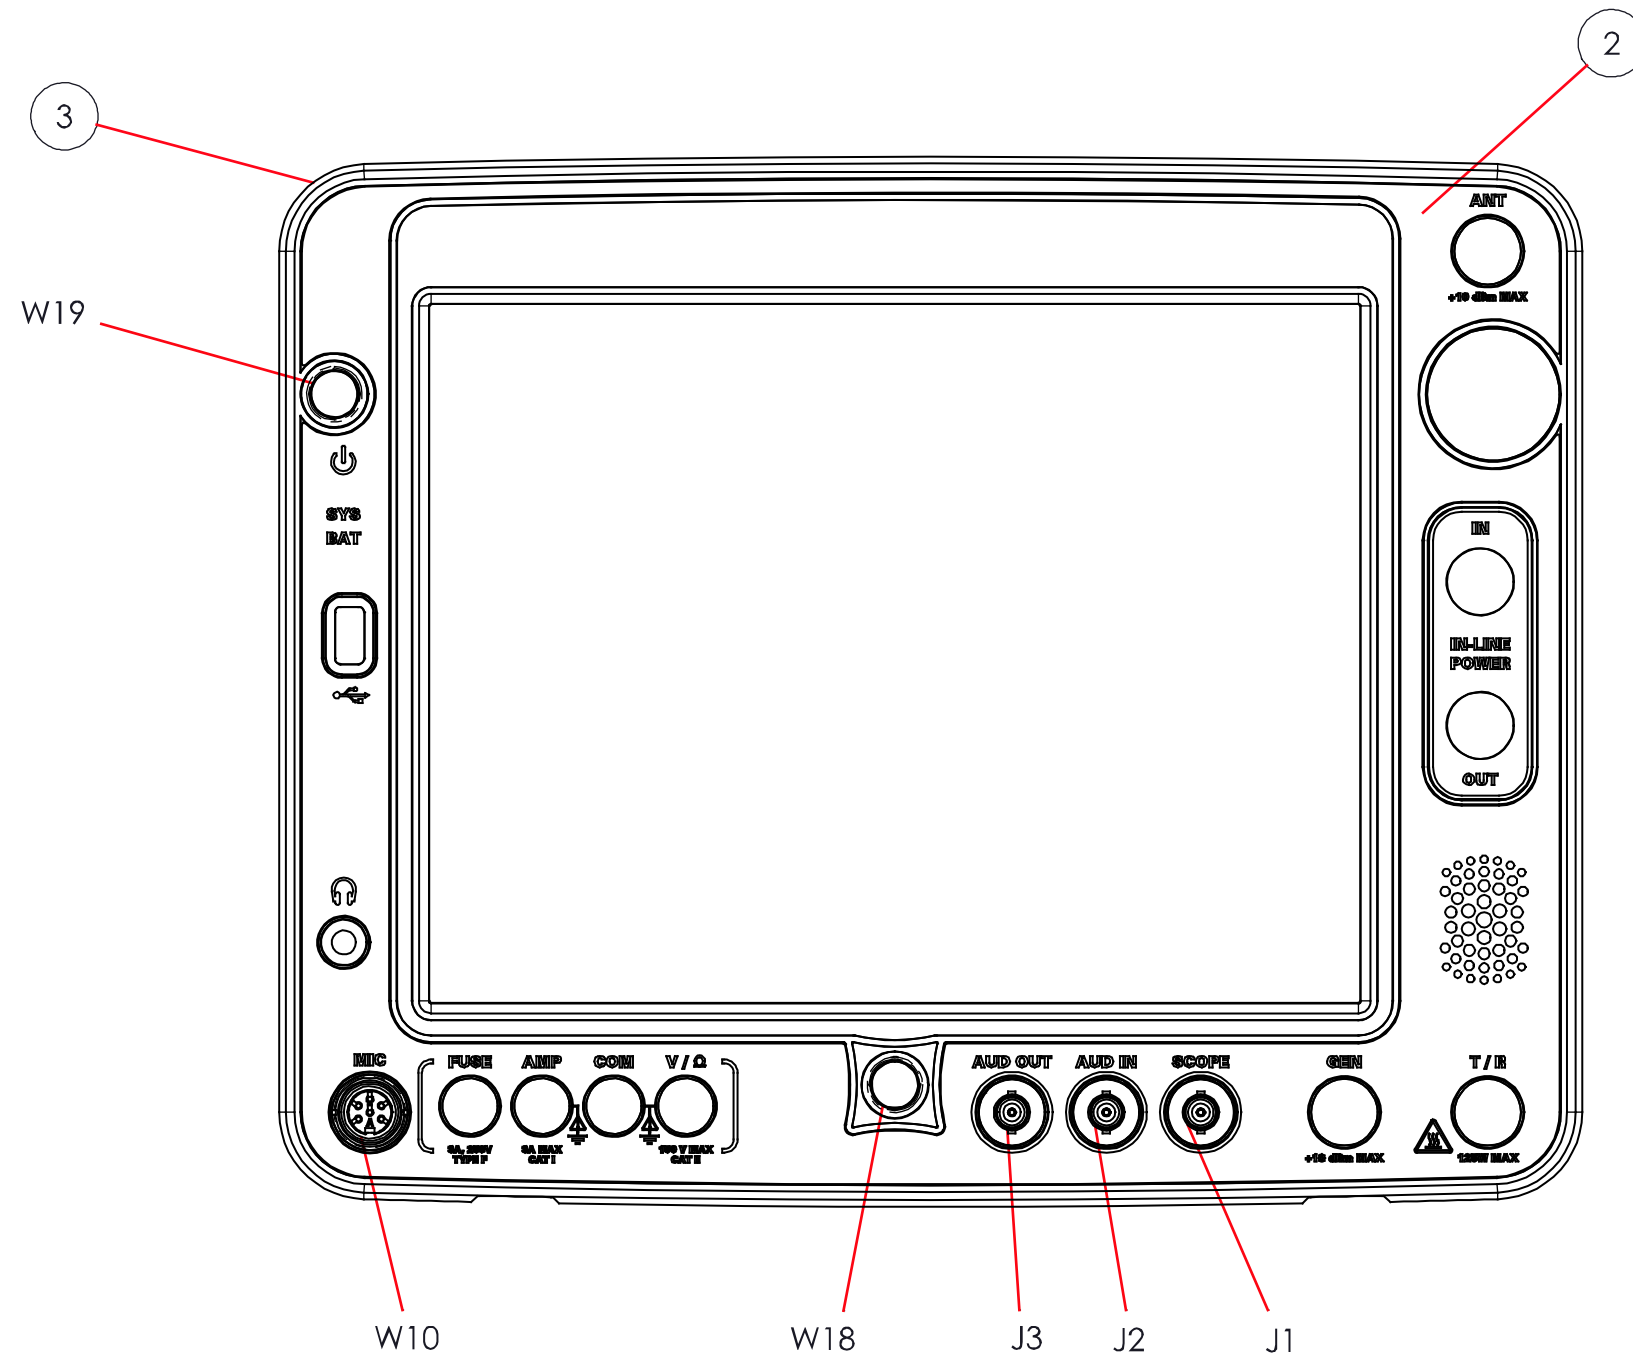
Front Chassis / Panel Assy (Sheet 1 of 6)
